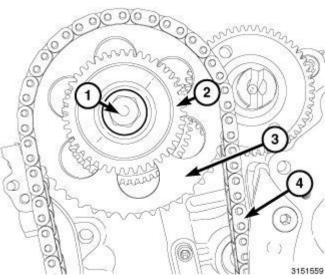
High Pressure Pump Drive Gear, Right Timing Chain Sprocket, Timing Chain & Bolt Courtesy of CHRYSLER GROUP, LLC
